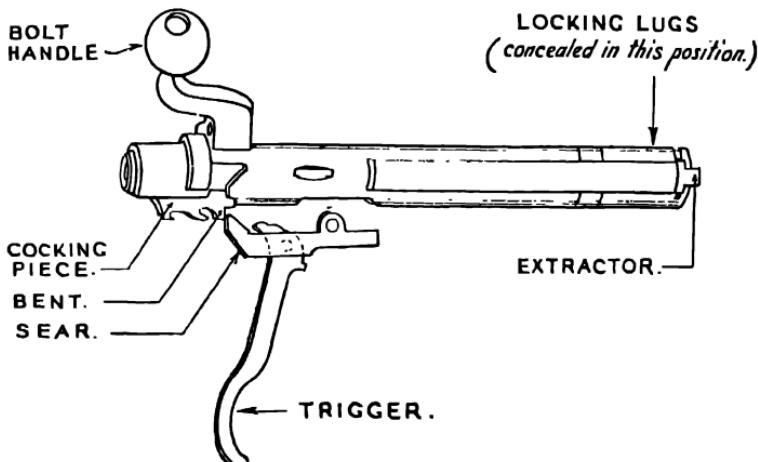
Bolt action of P.14 Rifle, showing Engagement of Sear with Cocking Piece.
